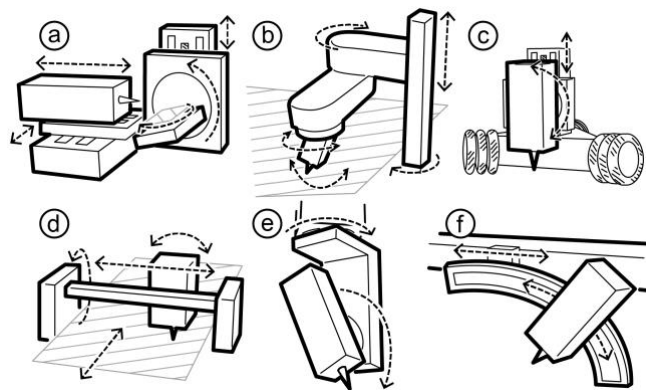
What might be the form factor of future 5DOF laser cutters? Drawing inspiration from milling machines may include (a) *PocketNC* [29], (b) *SCARA* [18] and *Dobot* [30], (c) *Goliath* [33], (d) *Glowforge* [10], and (e) [39]. (f) Or an entirely new design?
